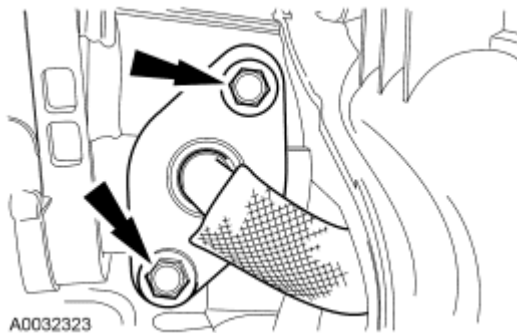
Locating Bolts & Engine Wiring Harness
